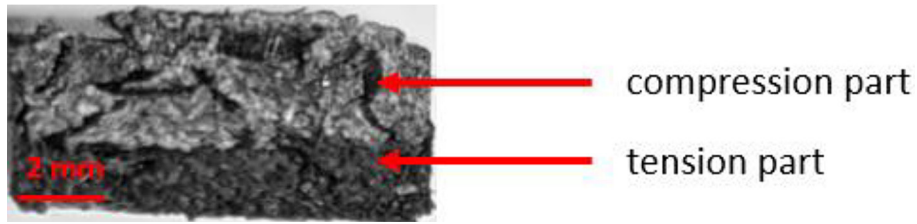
View of the fracture surface of the specimen (PA6 + GF) impact-bent
